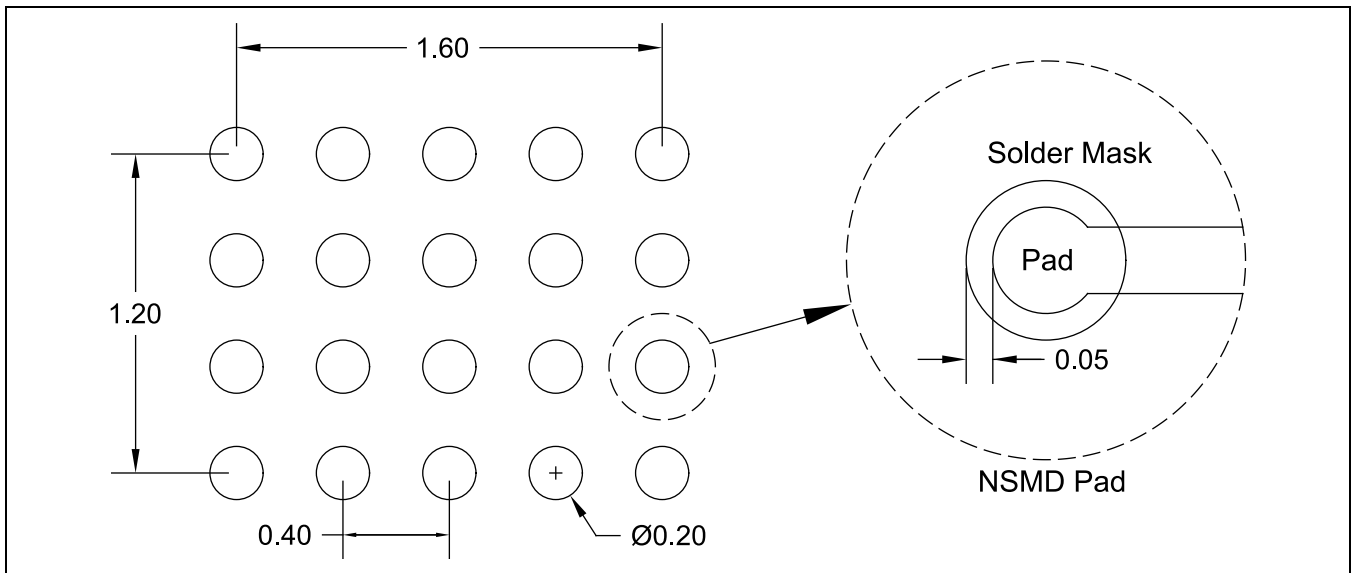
WLCSP 20B 2.1mm x 1.7mm soldering footprint (NOT TO SCALE)
